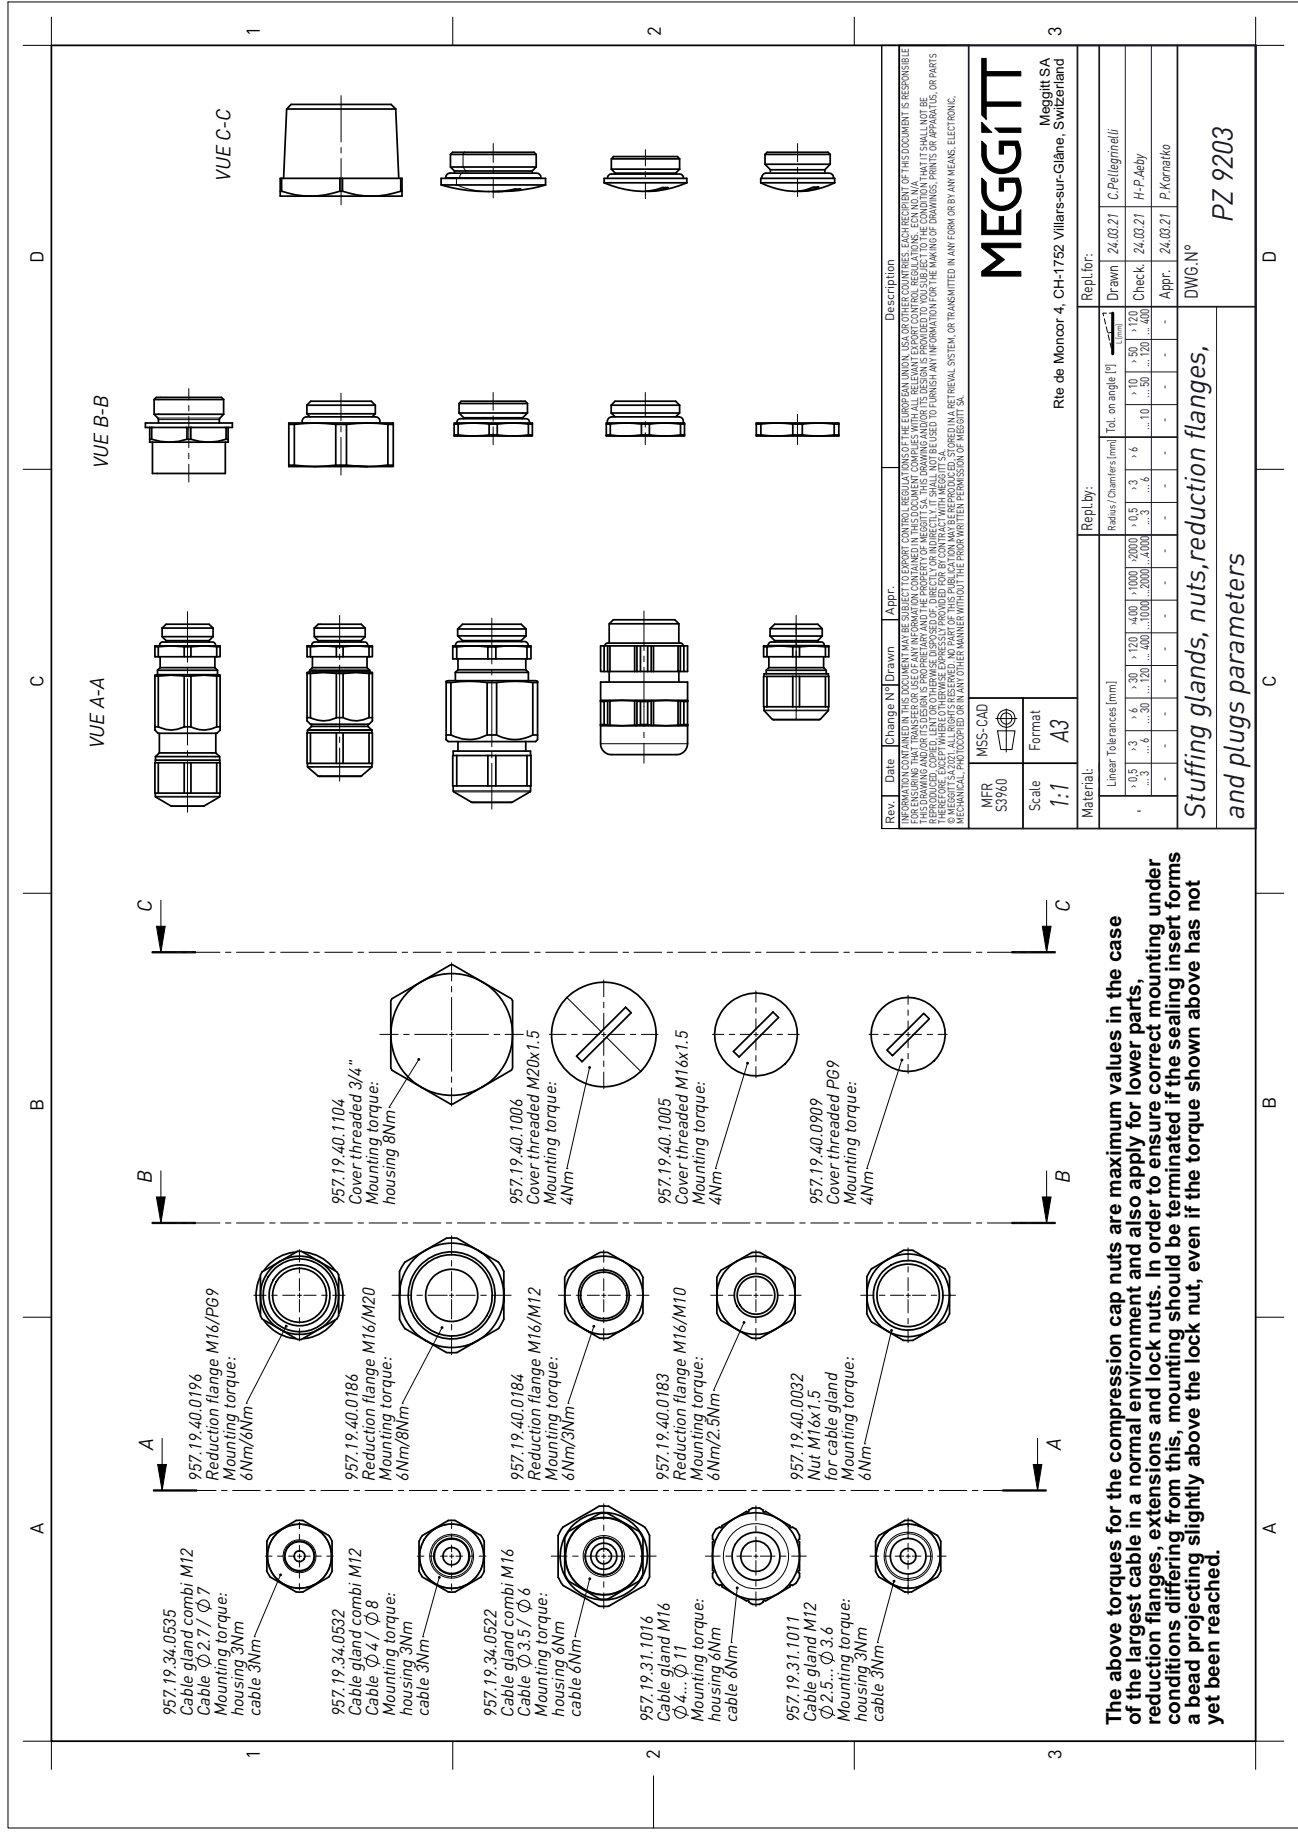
outlines the recommended tightening torque values for the proper assembly of cable fittings (stuffing glands) on ABA17x industrial housings.
